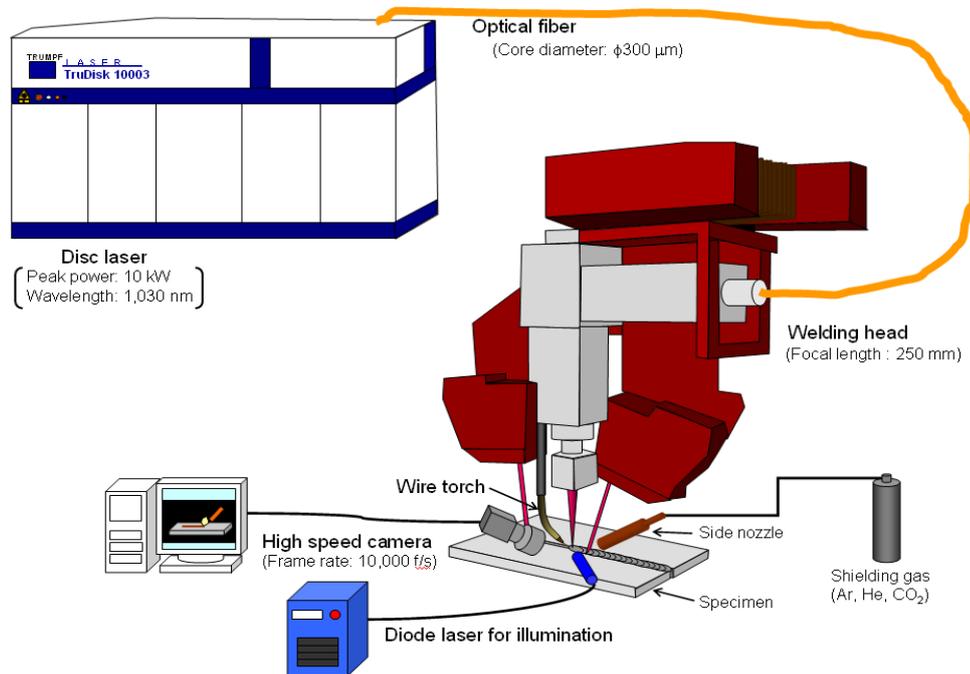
Welding setup – TruDisk 10003 and HighYAG welding head
